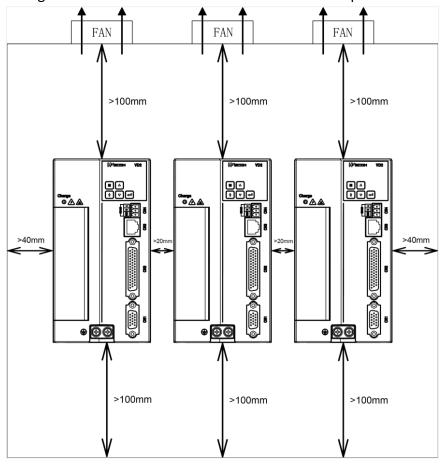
Parallel installation dimensions of multiple VD2B drive
